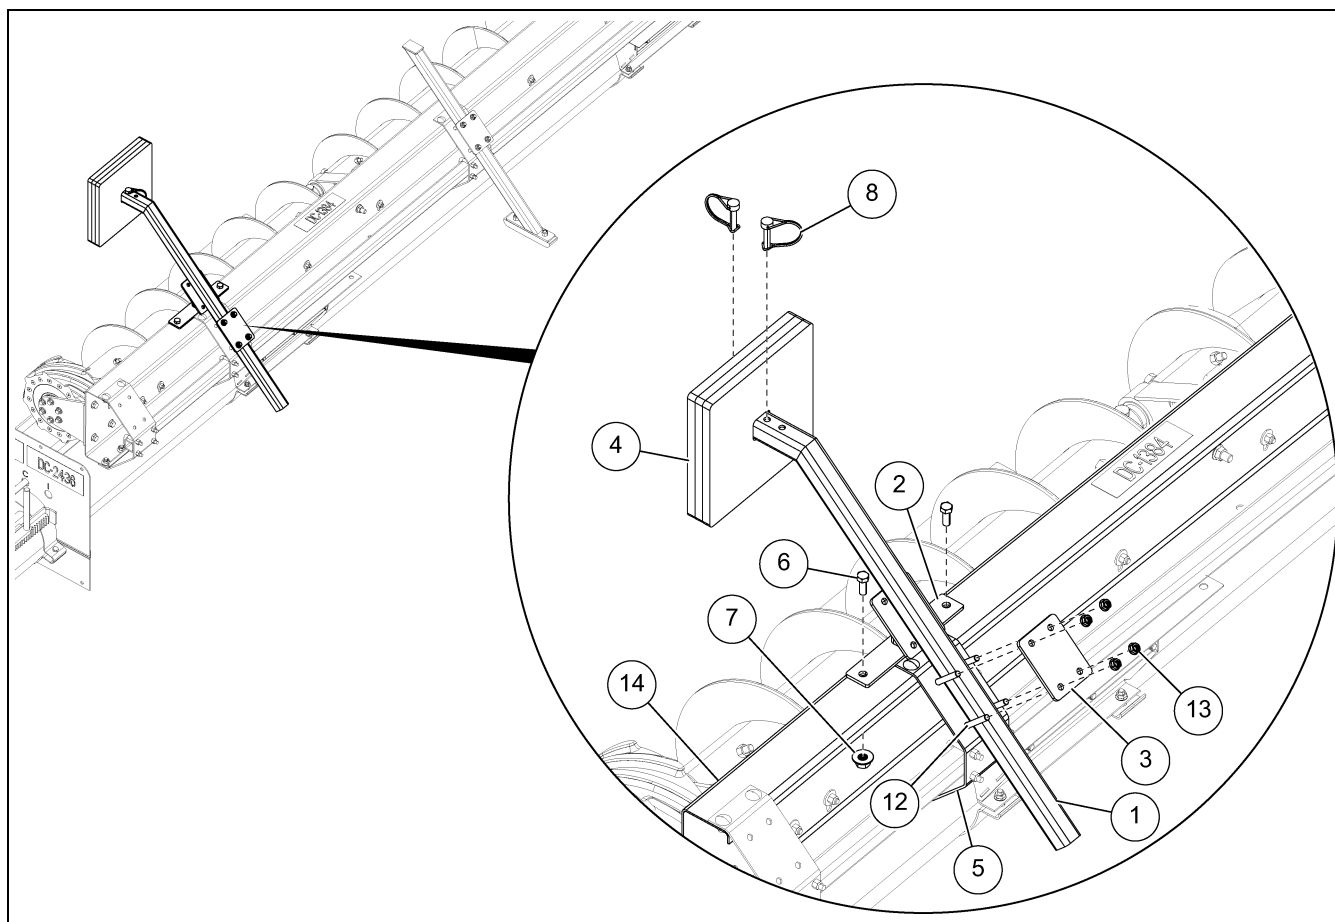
Installing the Backshield Counterweight Kit Assembly
